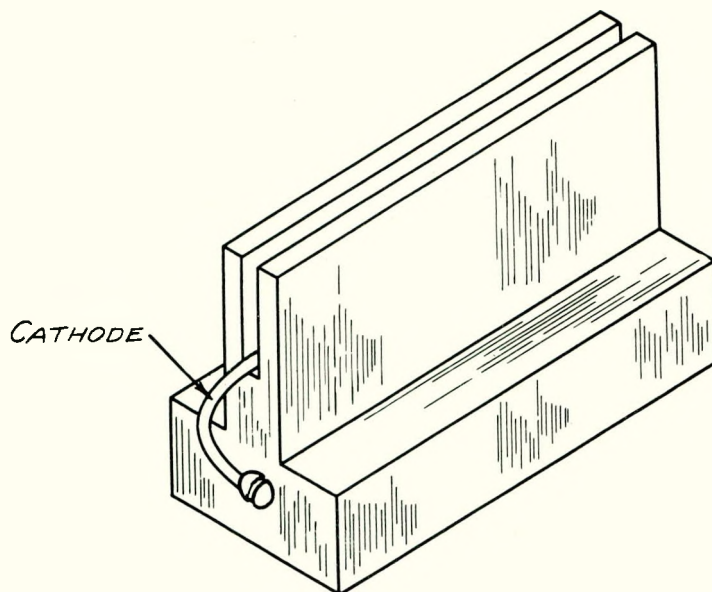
Line-Type Cathode Assembly With Extended Side Shielding.
